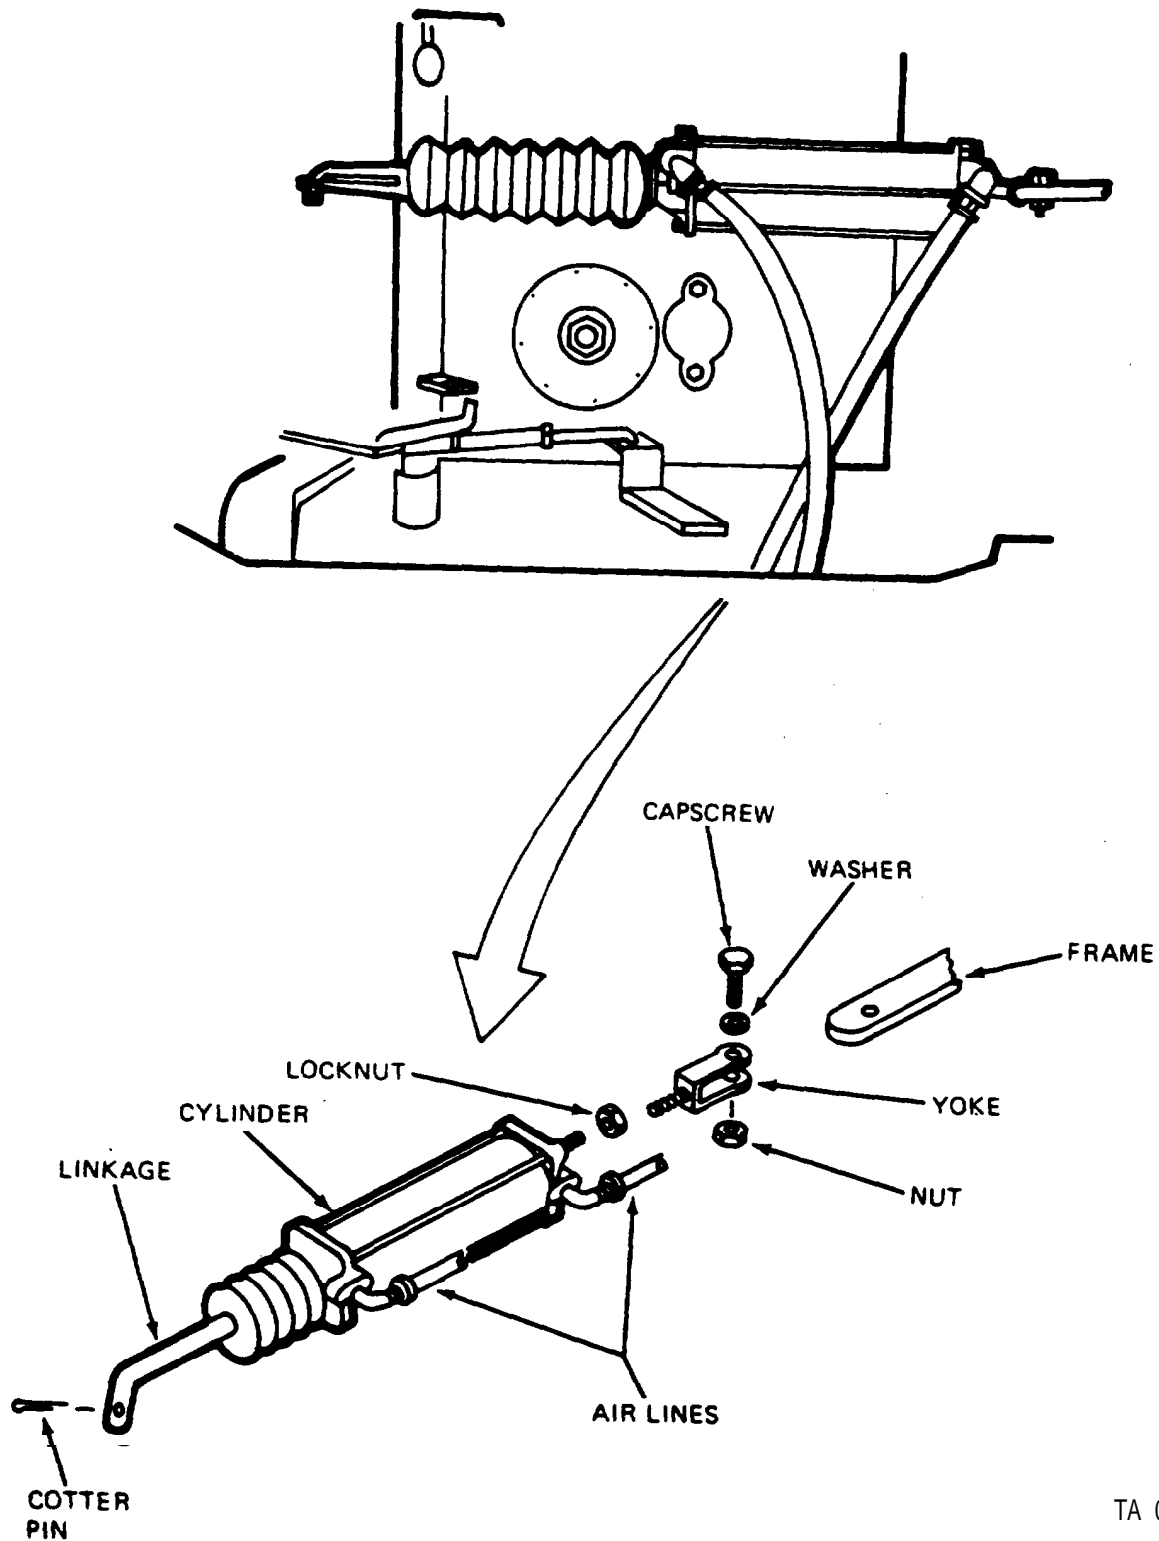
Remove/Install Top Bar On-Off Cylinder.
